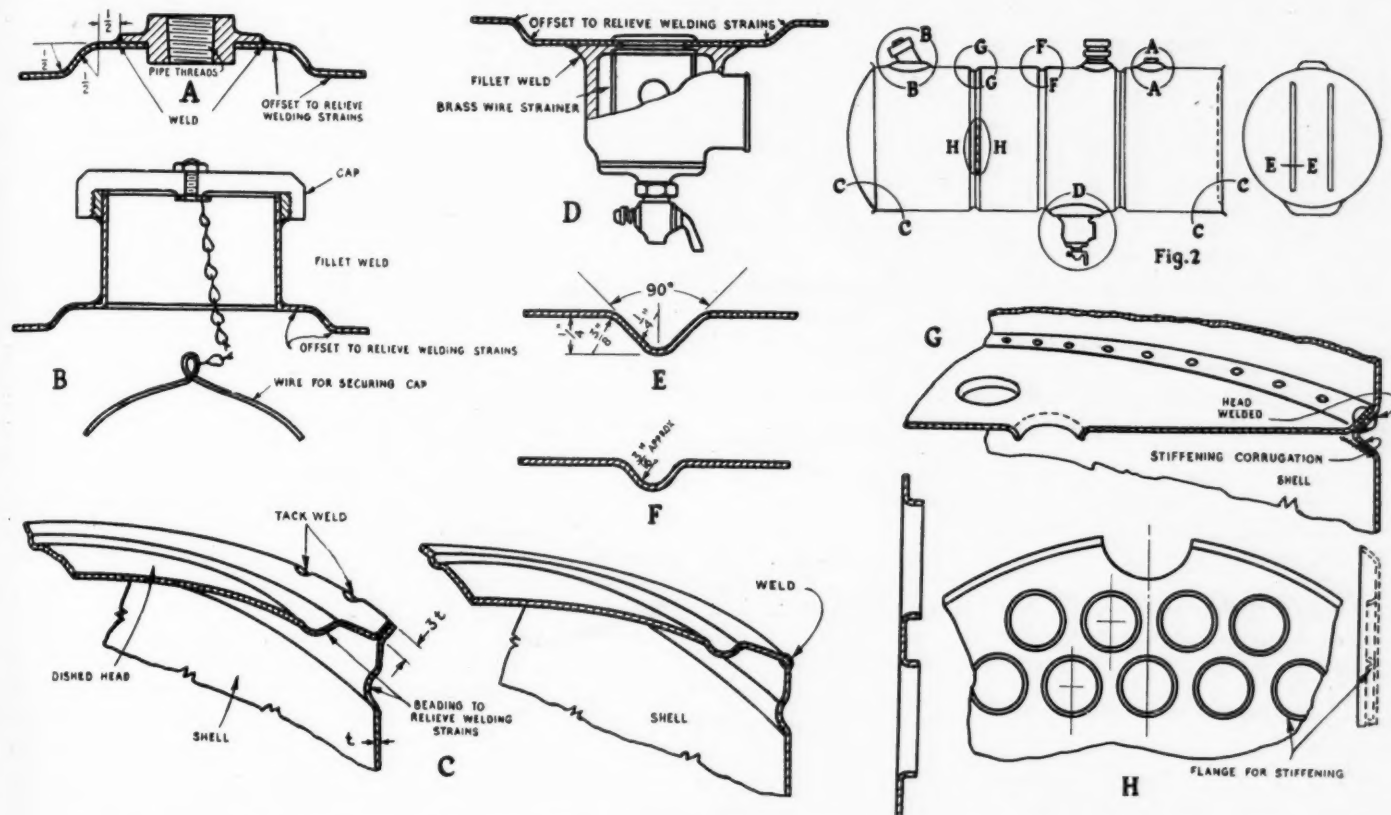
Welded aluminum tank with fittings. A—Lapped flange. B—Filler detail. C—Header joint. D—Sump detail. E—Typical corrugation for stiffening shells and heads of large tanks. F—Typical groove for relieving welding strains and for stiffening shells and heads of small tanks. G—Baffle attachment. H—Typical baffle detail.
